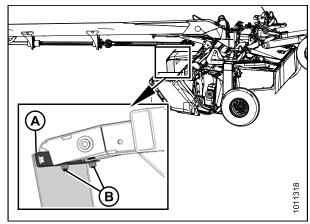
Inboard Curtain Attached to Mower Conditioner
